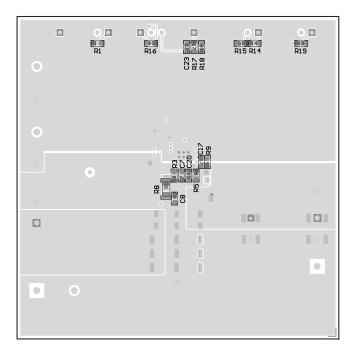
TPS40170EVM-597 Bottom Assembly and Silkscreen (Viewed from Bottom)
